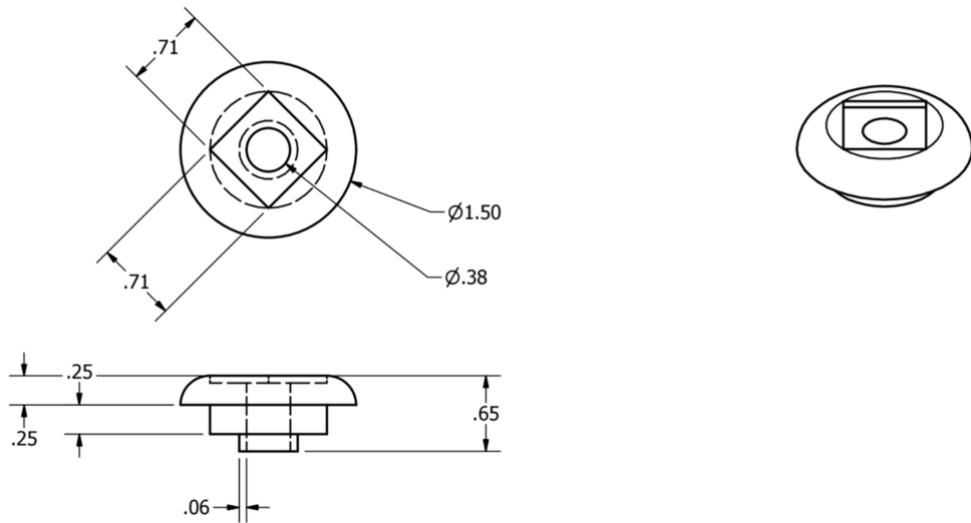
Stationary Shaft Mount. Drawing showing part that centers stationary shaft in top of acrylic globe. Dimensions in inches.
